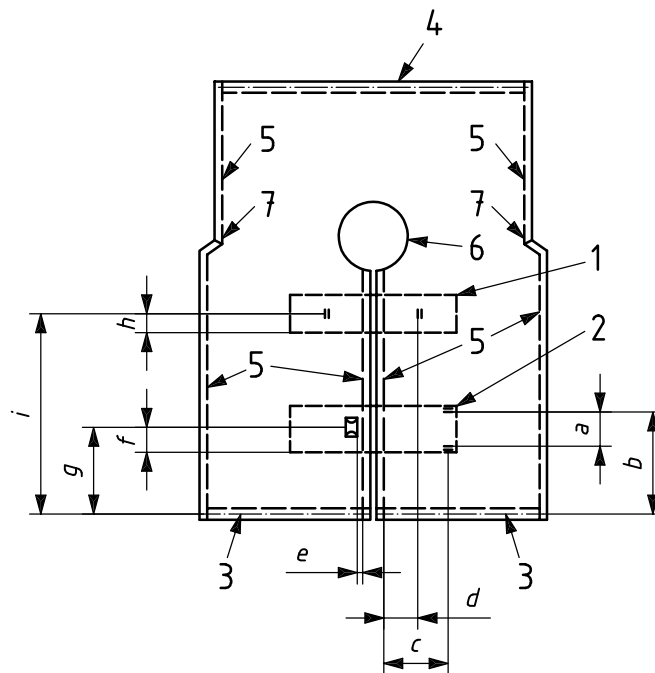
Chest strap assembly (adjustable part left and fixed part right)
